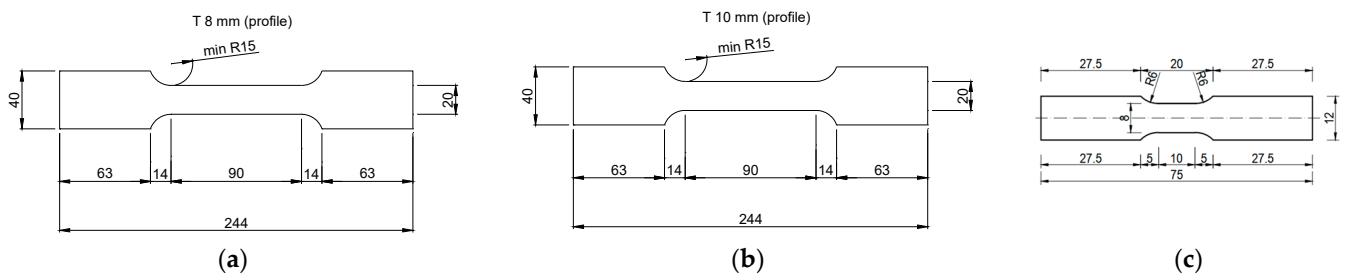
Tensile tests specimen for: (a) RHS; (b) CHS; (c) bolts.
